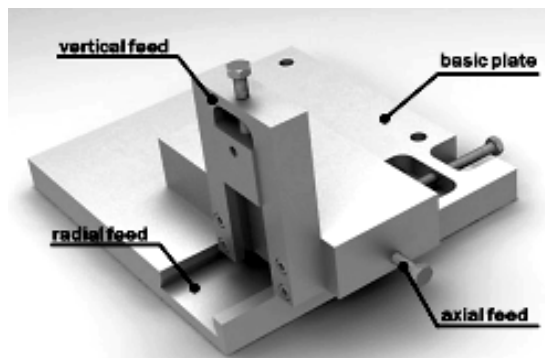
Macro-stand with triaxial feed for mounting of high-speed imaging camcorder, which provides simultaneous movement of the cutting tool and camcorder
